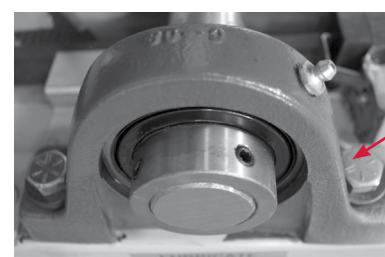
Inspect bearing collar to ensure all bolts and screws are tight.
